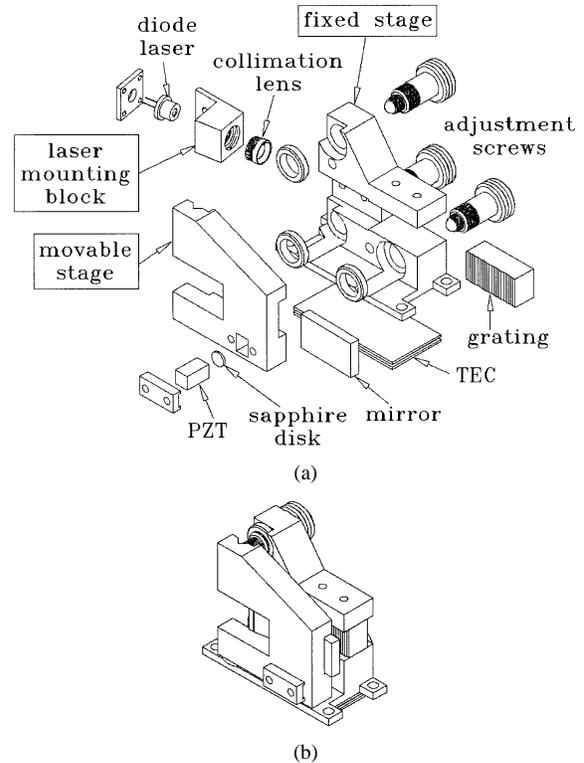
Three-dimensional drawing of the ECDL (a) before and (b) after assembling. The screws used for fixing the components are not shown.
